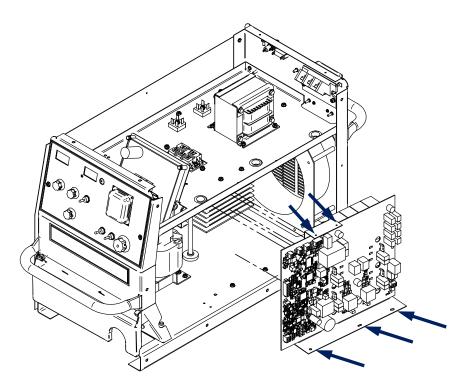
SWITCHBOARD ASSEMBLY REMOVAL
